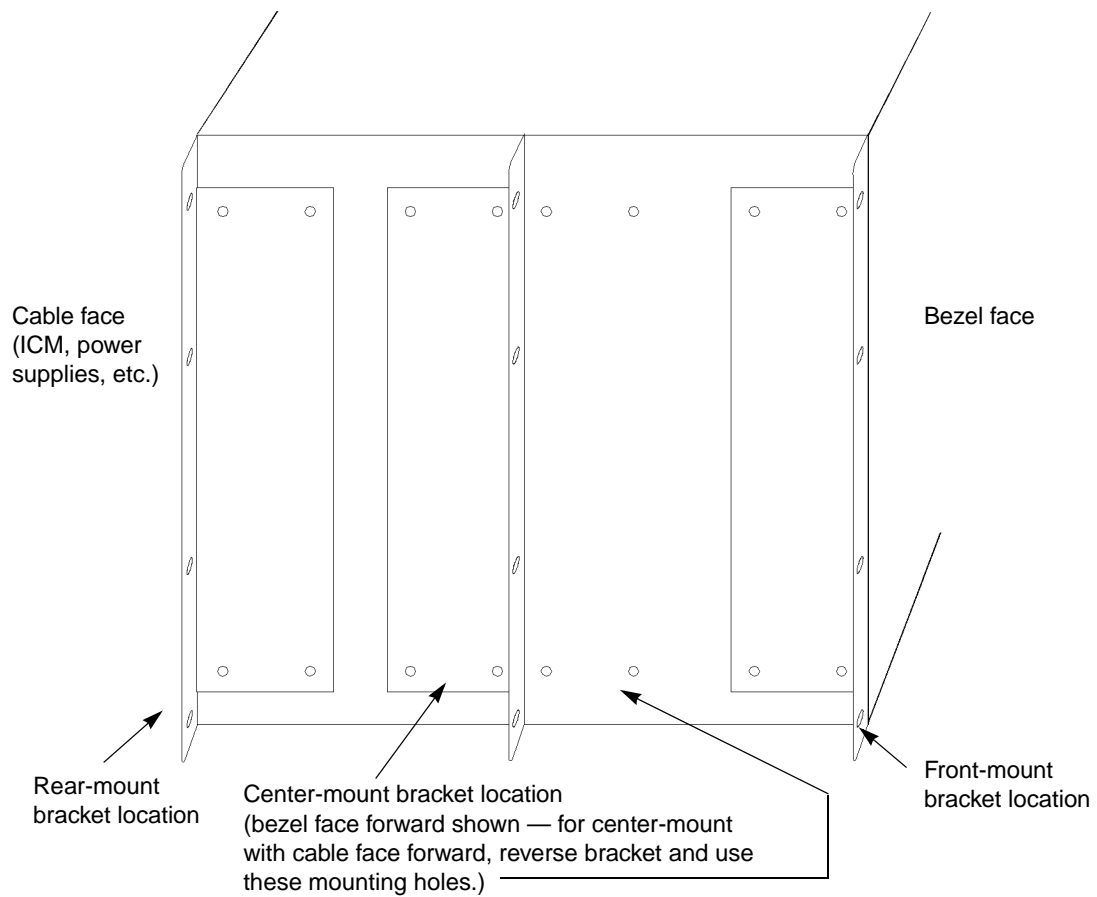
Bracket Locations (19-inch Brackets Shown)
